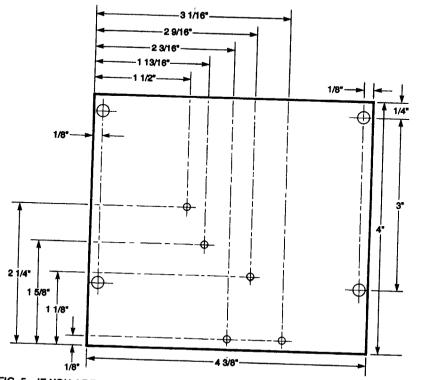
IF YOU ARE MOUNTING THE BASE UNIT in a plastic enclosure, you will need an aluminum baseplate cut and drilled to these dimensions.
